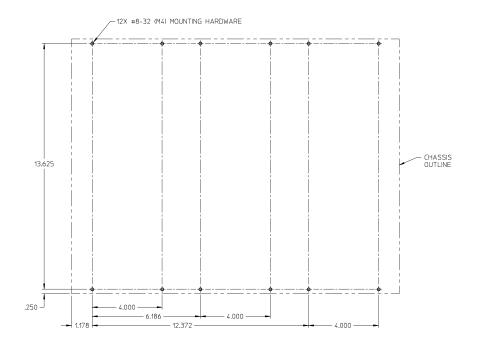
Mounting Template of MicroNet TMR Main Chassis
